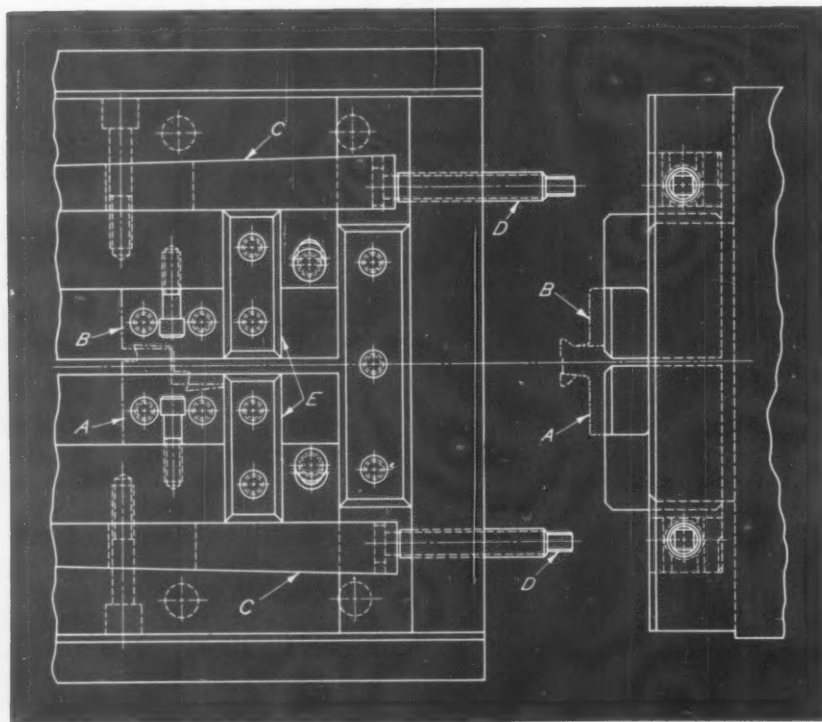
Part of a typical insert type broach holder with two inserts, (A) and (B), shown in place. Adjustable tapered gibs (C) permit varying the width of cut.
